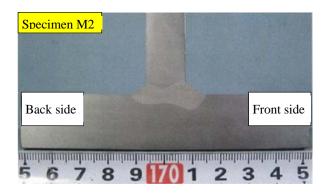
MACROSCOPIC OBSERVATIONS OF TACK WELDING.
